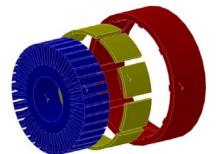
Stator stack, permanent magnets and rotor iron of an external rotor machine
